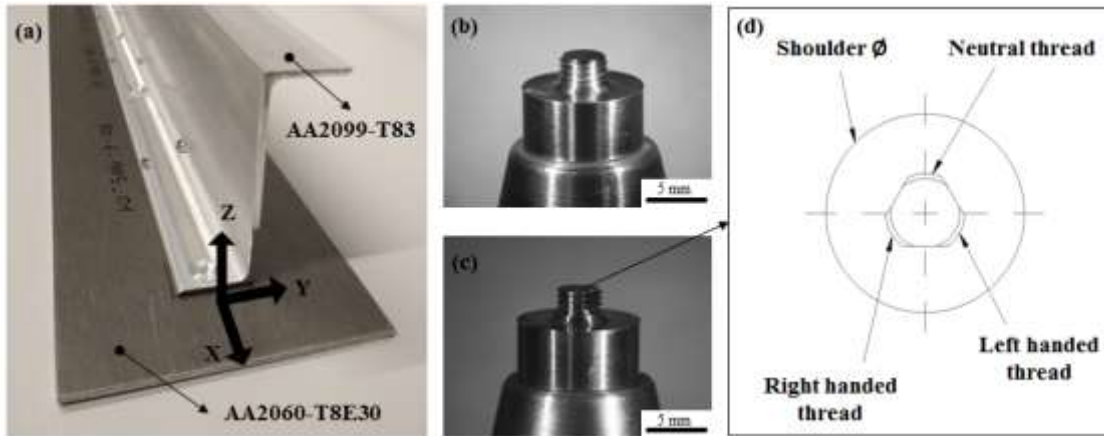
(a) FSLW joint produced using AA2099-T83 and AA2060-T8E30 alloys; (b) conventional tool; (c) new tool proposed for lap joints; (d) sketch with details of the new three flat + mixed thread tool.
